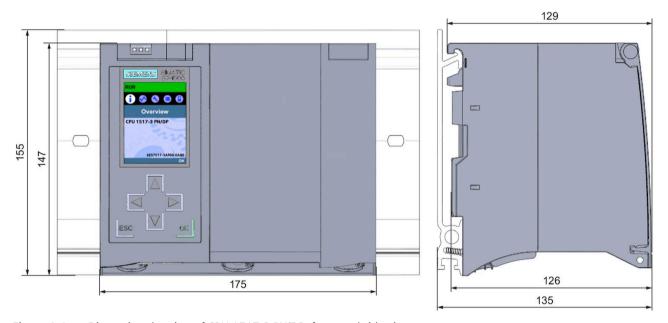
Dimension drawing of CPU 1517-3 PN/DP, front and side views
